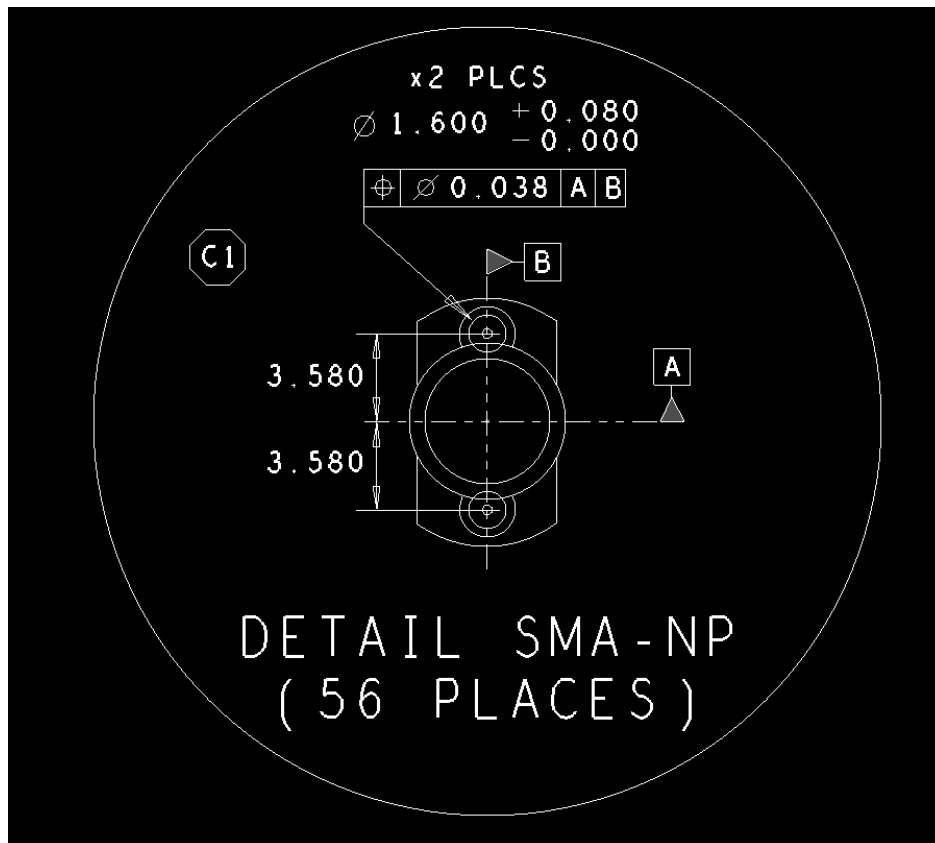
PCB fab drawing callout for connector mounting holes positioning tolerance
